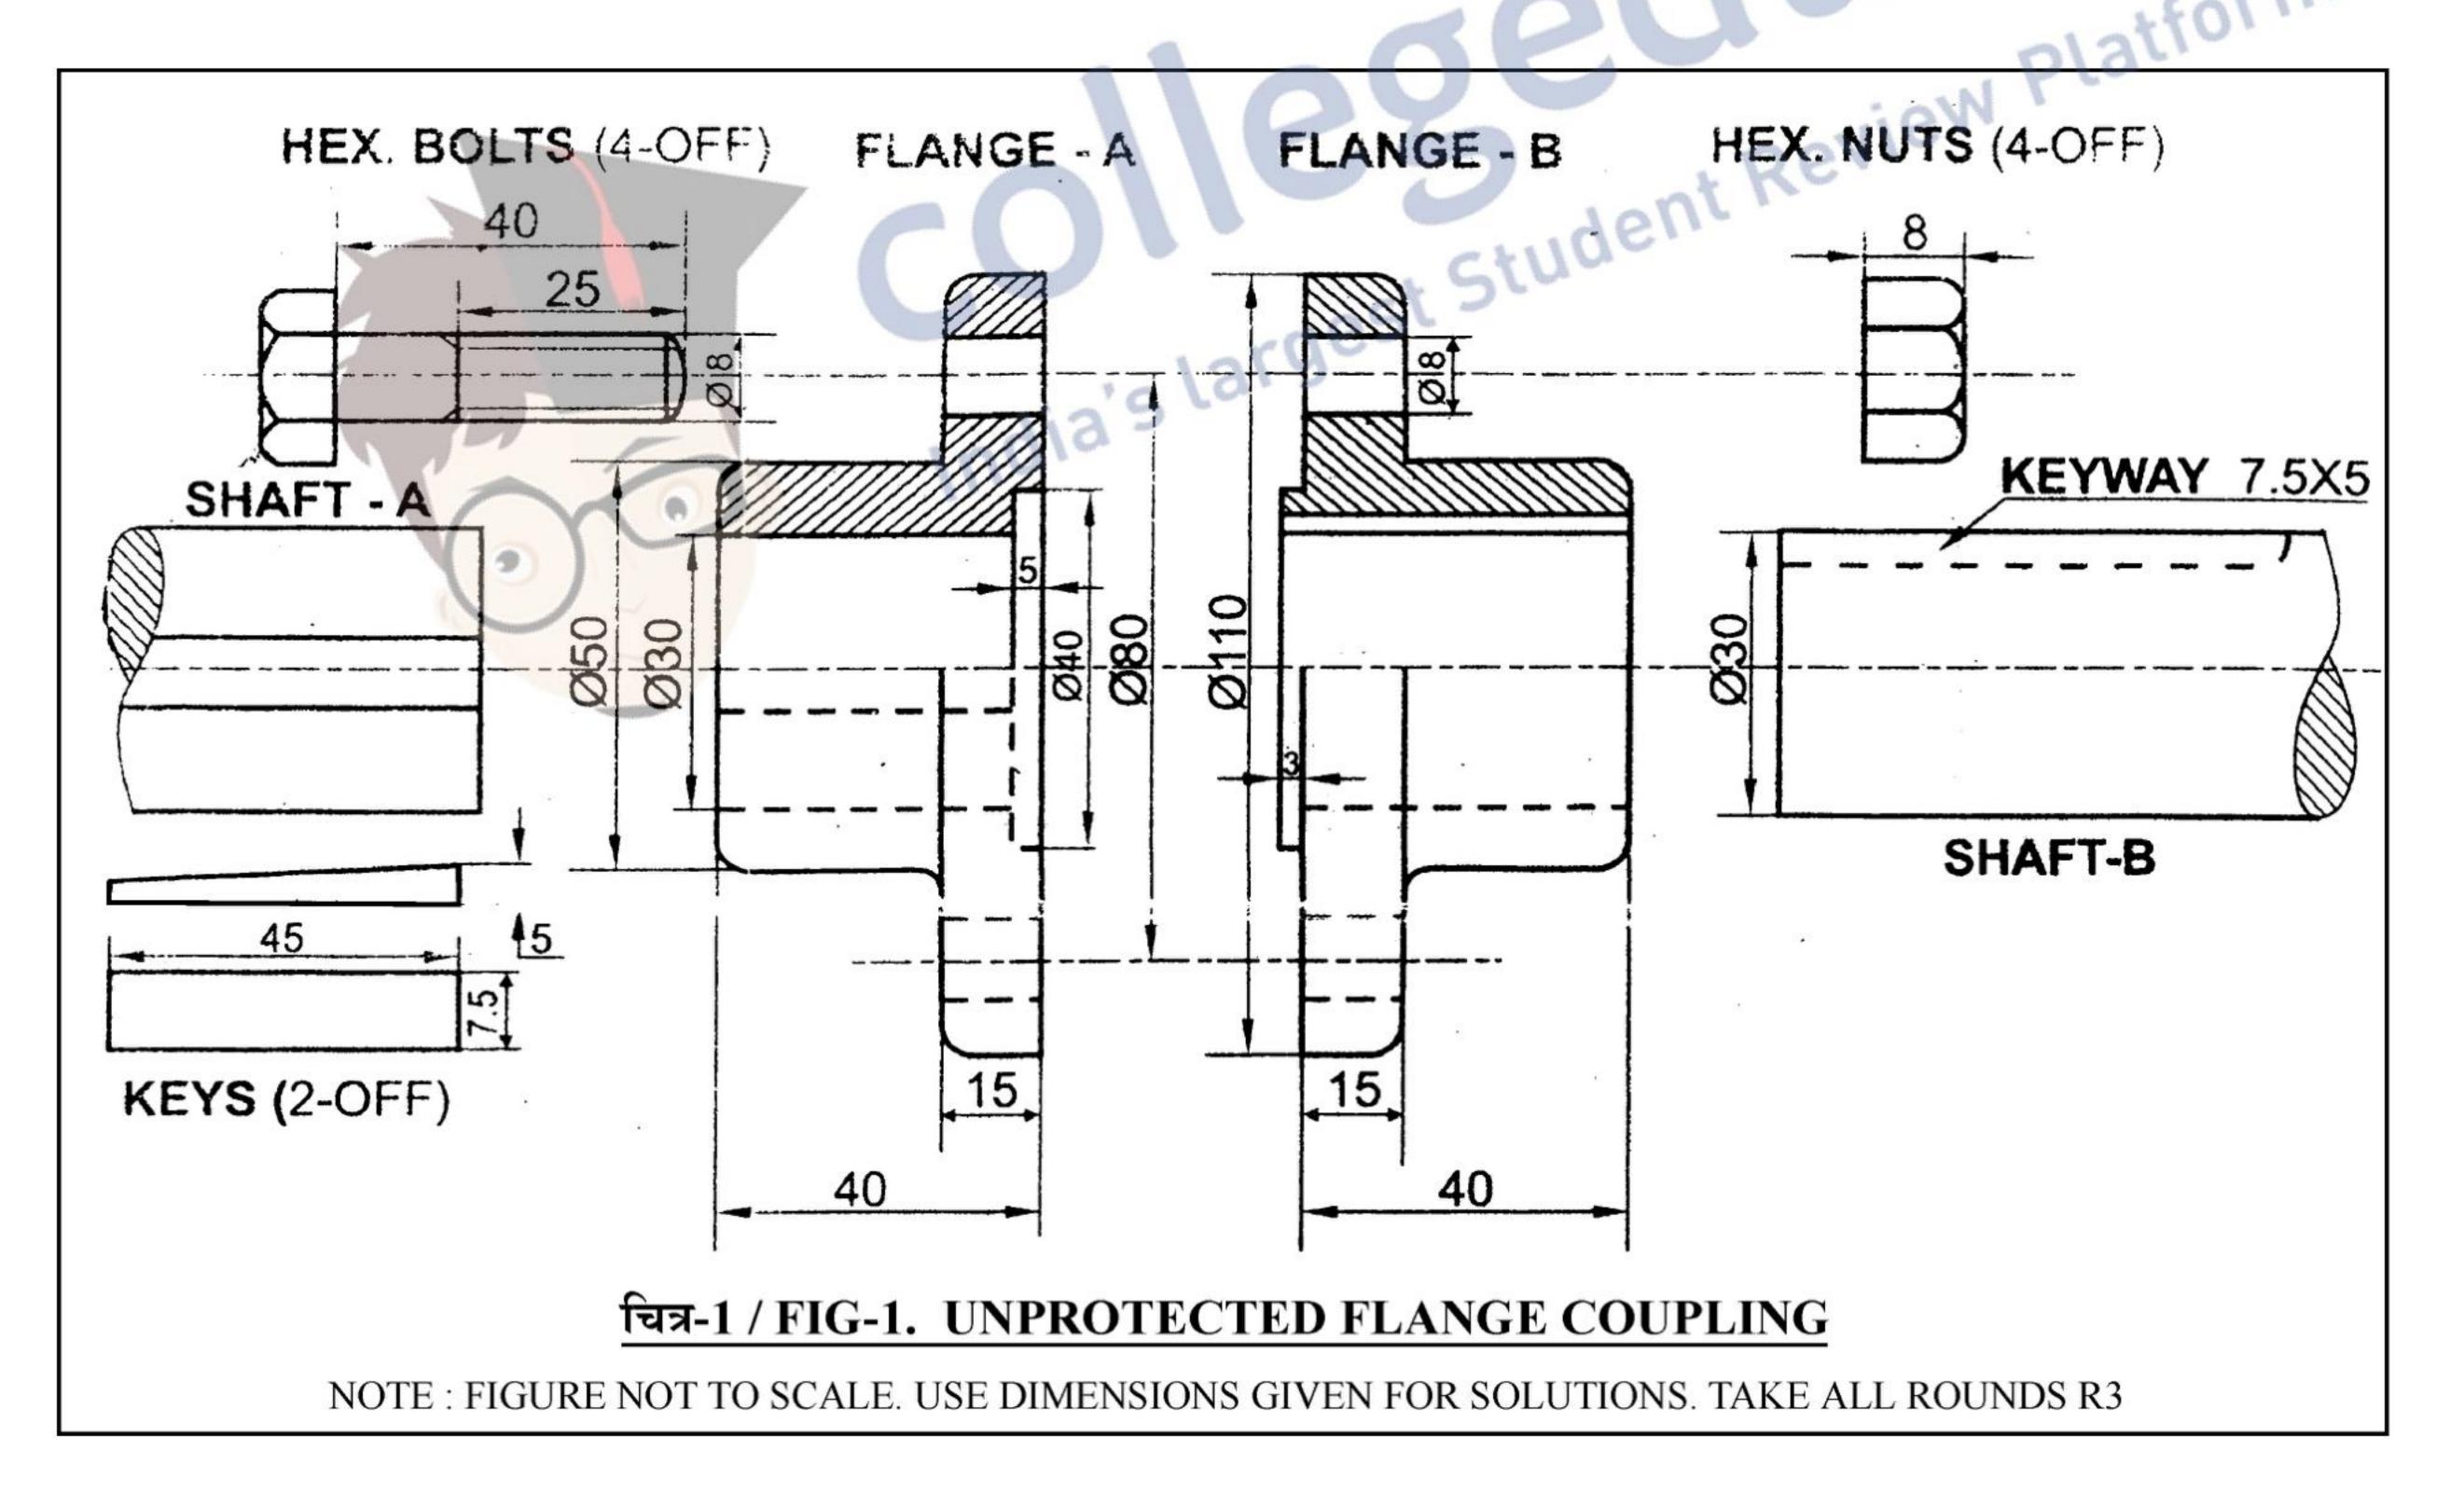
shows the details of the parts of a Unprotected flange coupling. Assemble
